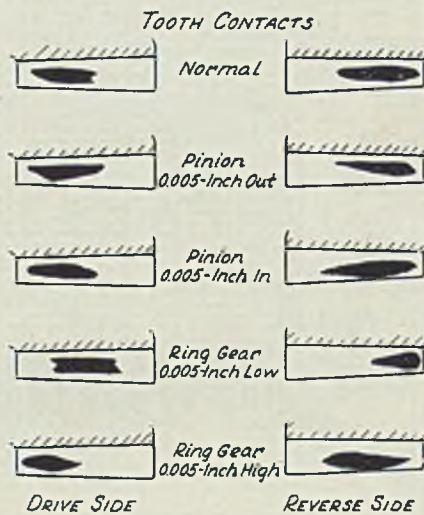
Sketch showing effect of 0.005-inch movement of pinion and ring gear on tooth contacts
